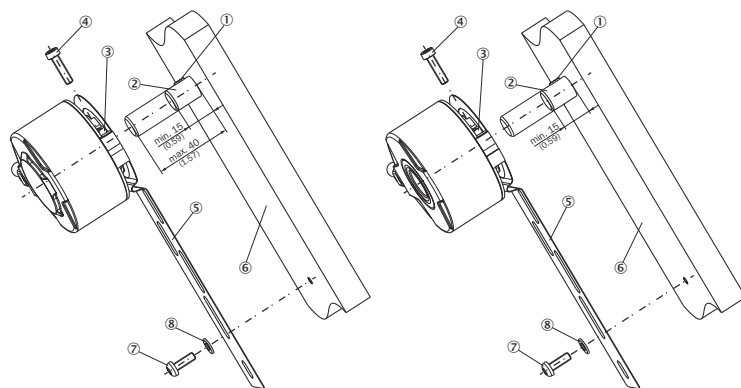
Mounting a blind hollow shaft encoder with a long stator coupling on one side
